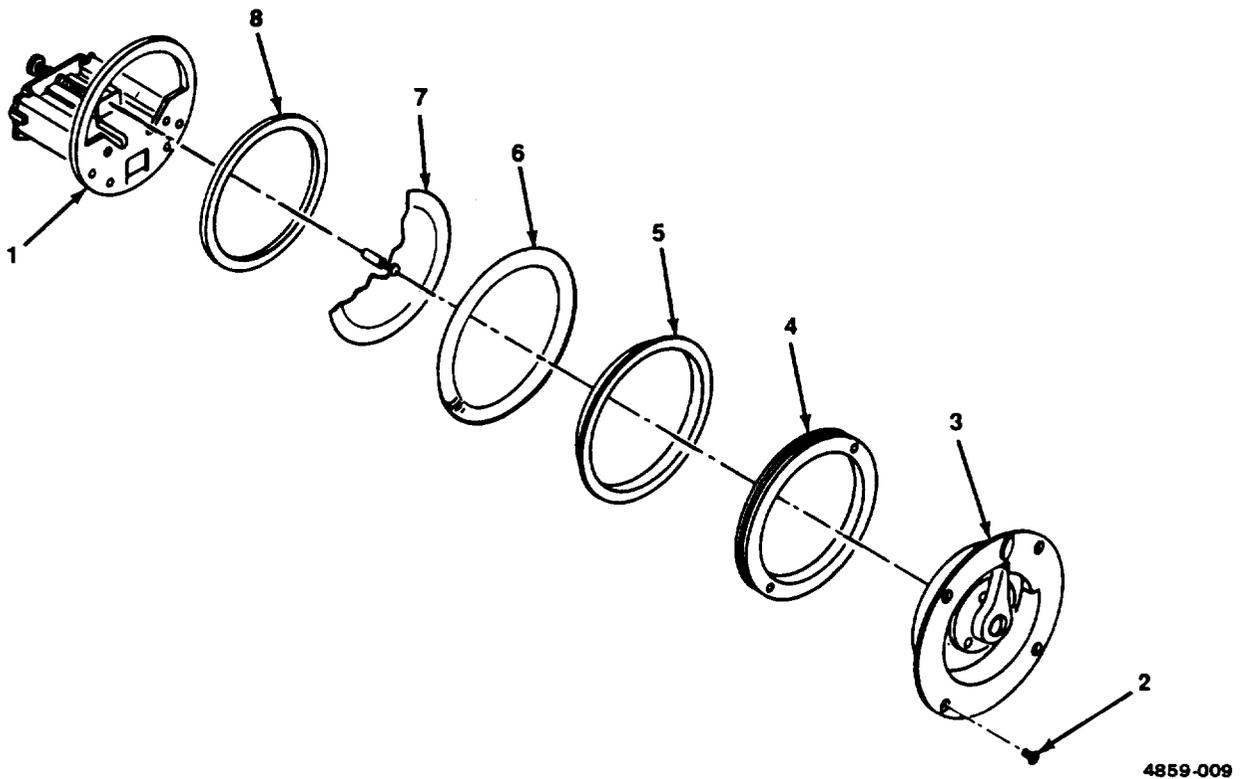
Buzzer Assembly DS101 or DS201, Replacement.
